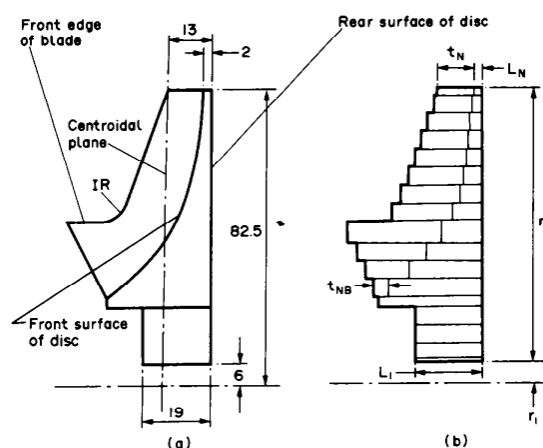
Representation of the bladed impeller: (a) sectional view, (b) replacement by a system of concentric stepped rings. [9]
